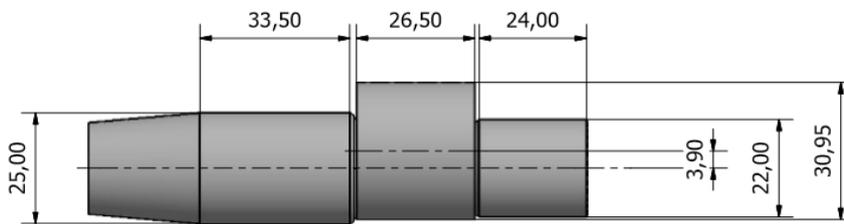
Dimensions of the driving shaft with an eccentric cam
